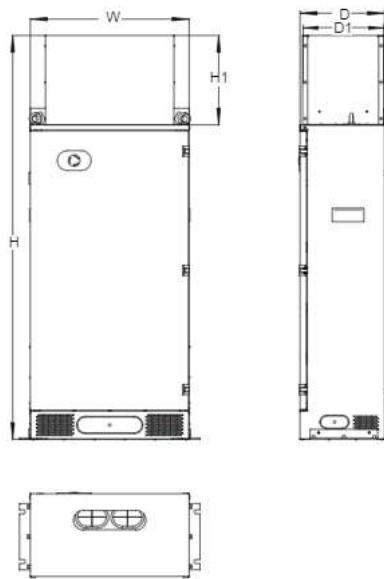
Overall dimensions - machine-room control cabinet (NICE3000B-4018 to NICE3000B-4037)
